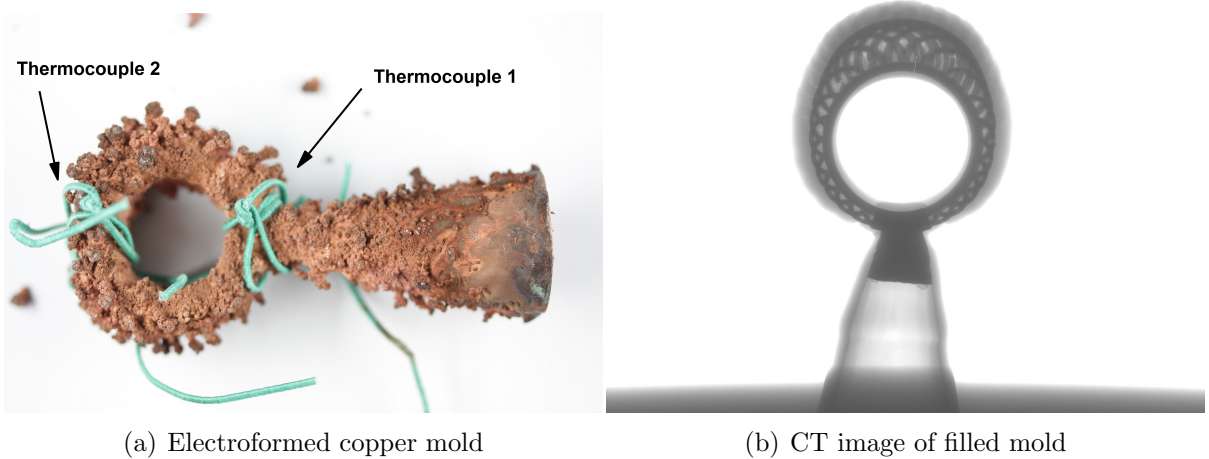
Casting into lost metal molds: electroformed copper molds CT image previously published in [13].
